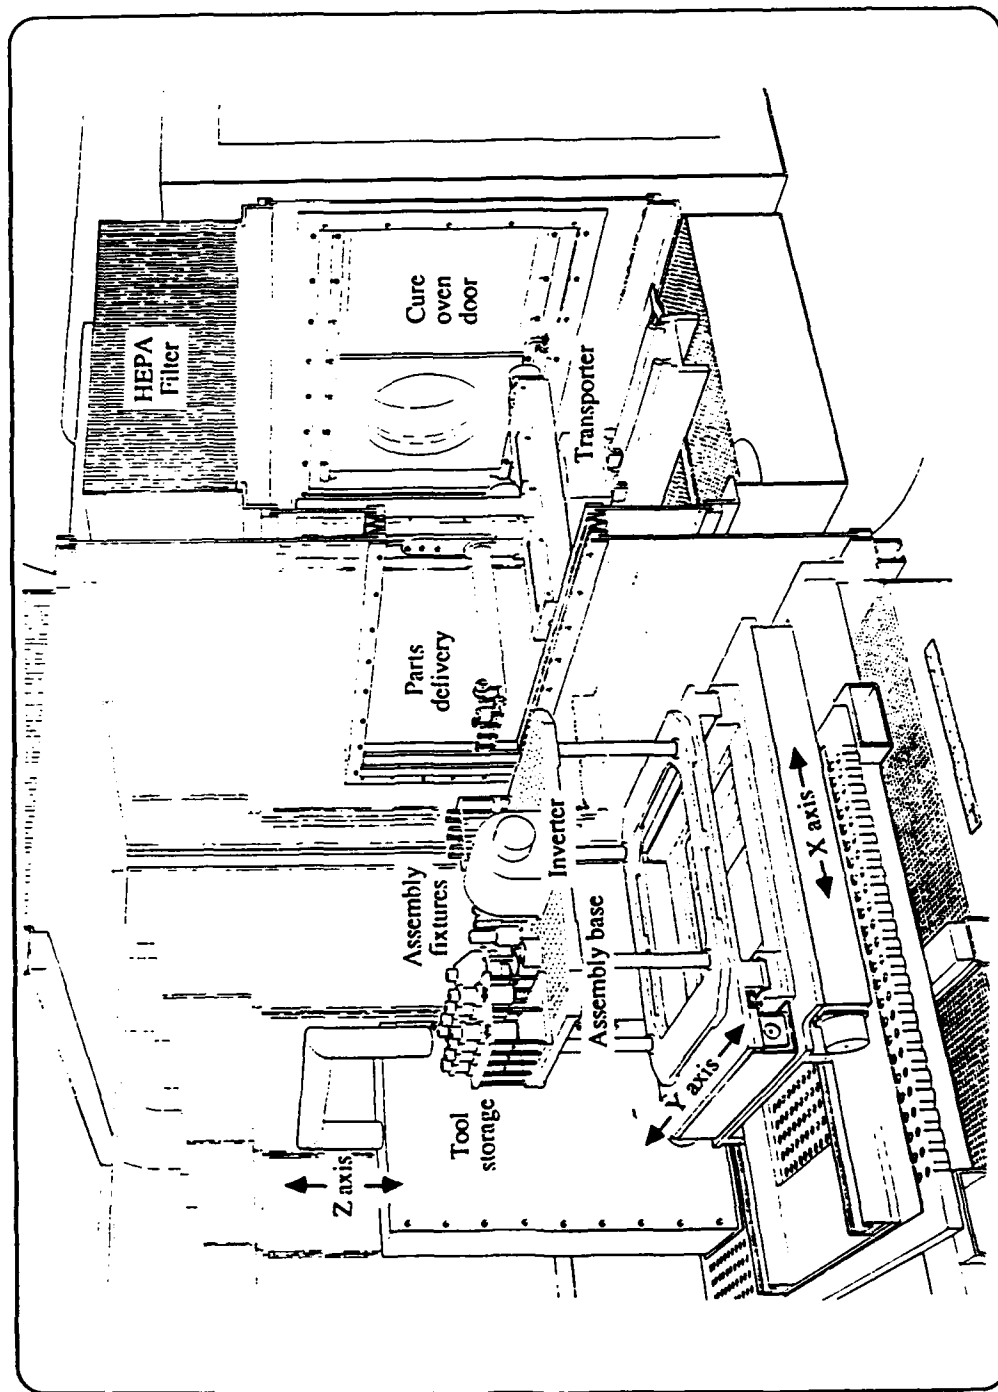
Automated Assembly System - Section through Assembly Workstation, Transport Compartment, and Curing Oven
